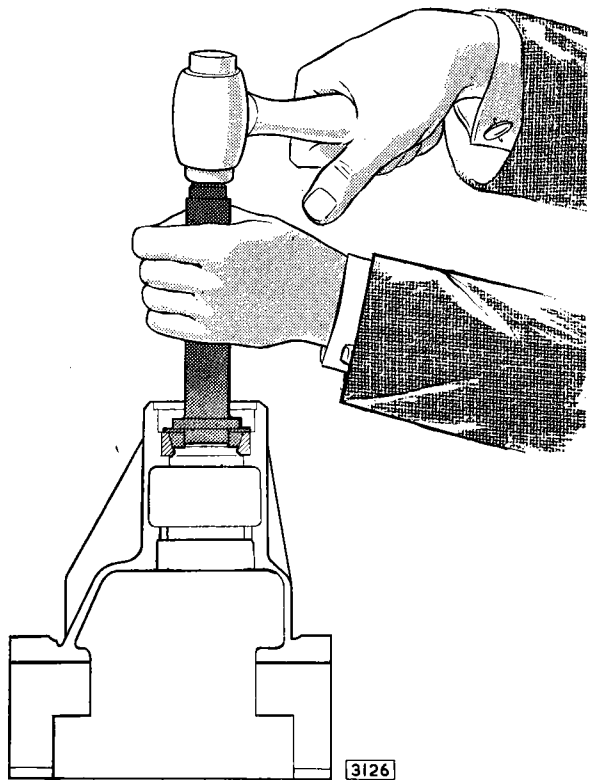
Replacing the pinion outer bearing outer race using Churchill Tool No. 550 with adaptor SL.550-4.
